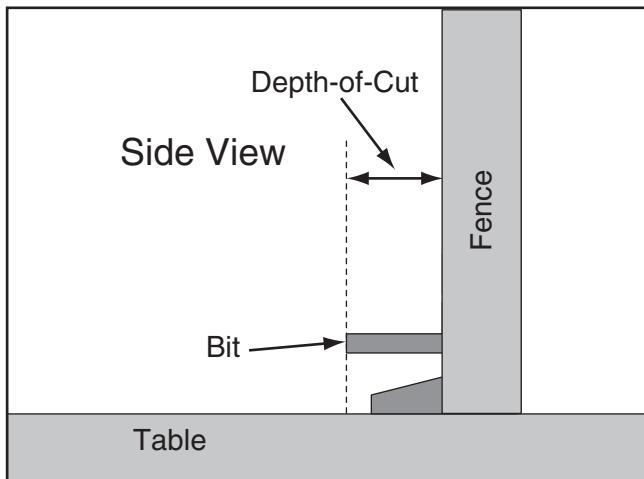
Groove cutting setup, side view (guard removed for clarity).
